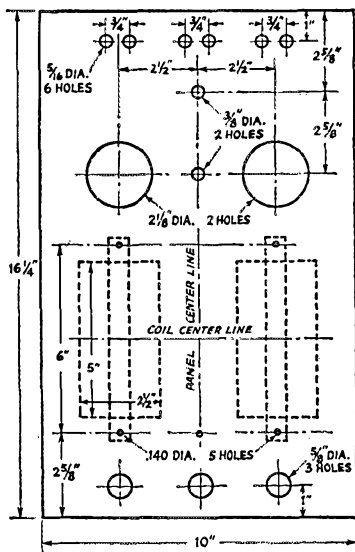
Panel layout of holes, showing dimensions of balun coils. Coil centers should be at least  $4\frac{1}{2}$  inches apart.
